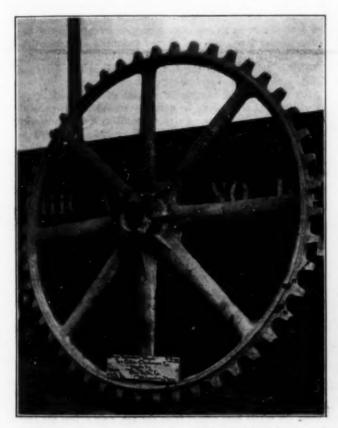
LARGE STEEL SPROCKET WHEEL MADE BY FALK CO. FOR ALLIS-CHALMERS CO.
